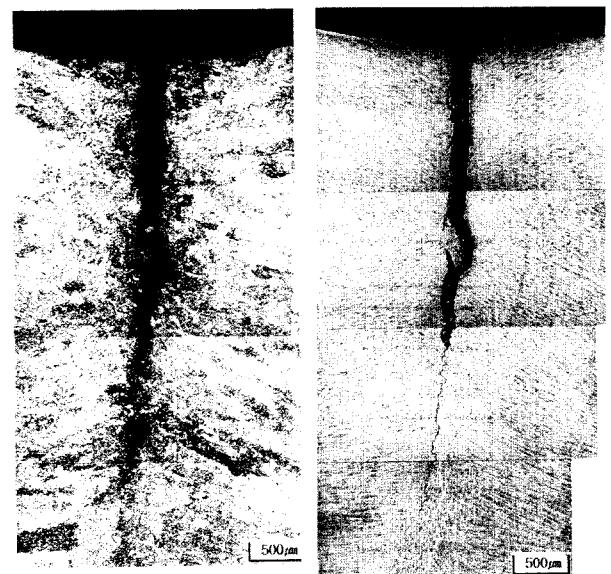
Microstructure near crack in weld metal of SPPV490 with welding wire C under welding condition of 240A-4.2mm/sec
